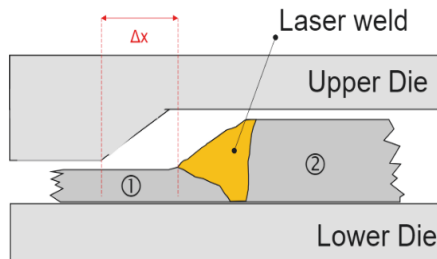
Misalignment of blanks in the mold may lead to a reduction in the cooling rate of the weld seam
